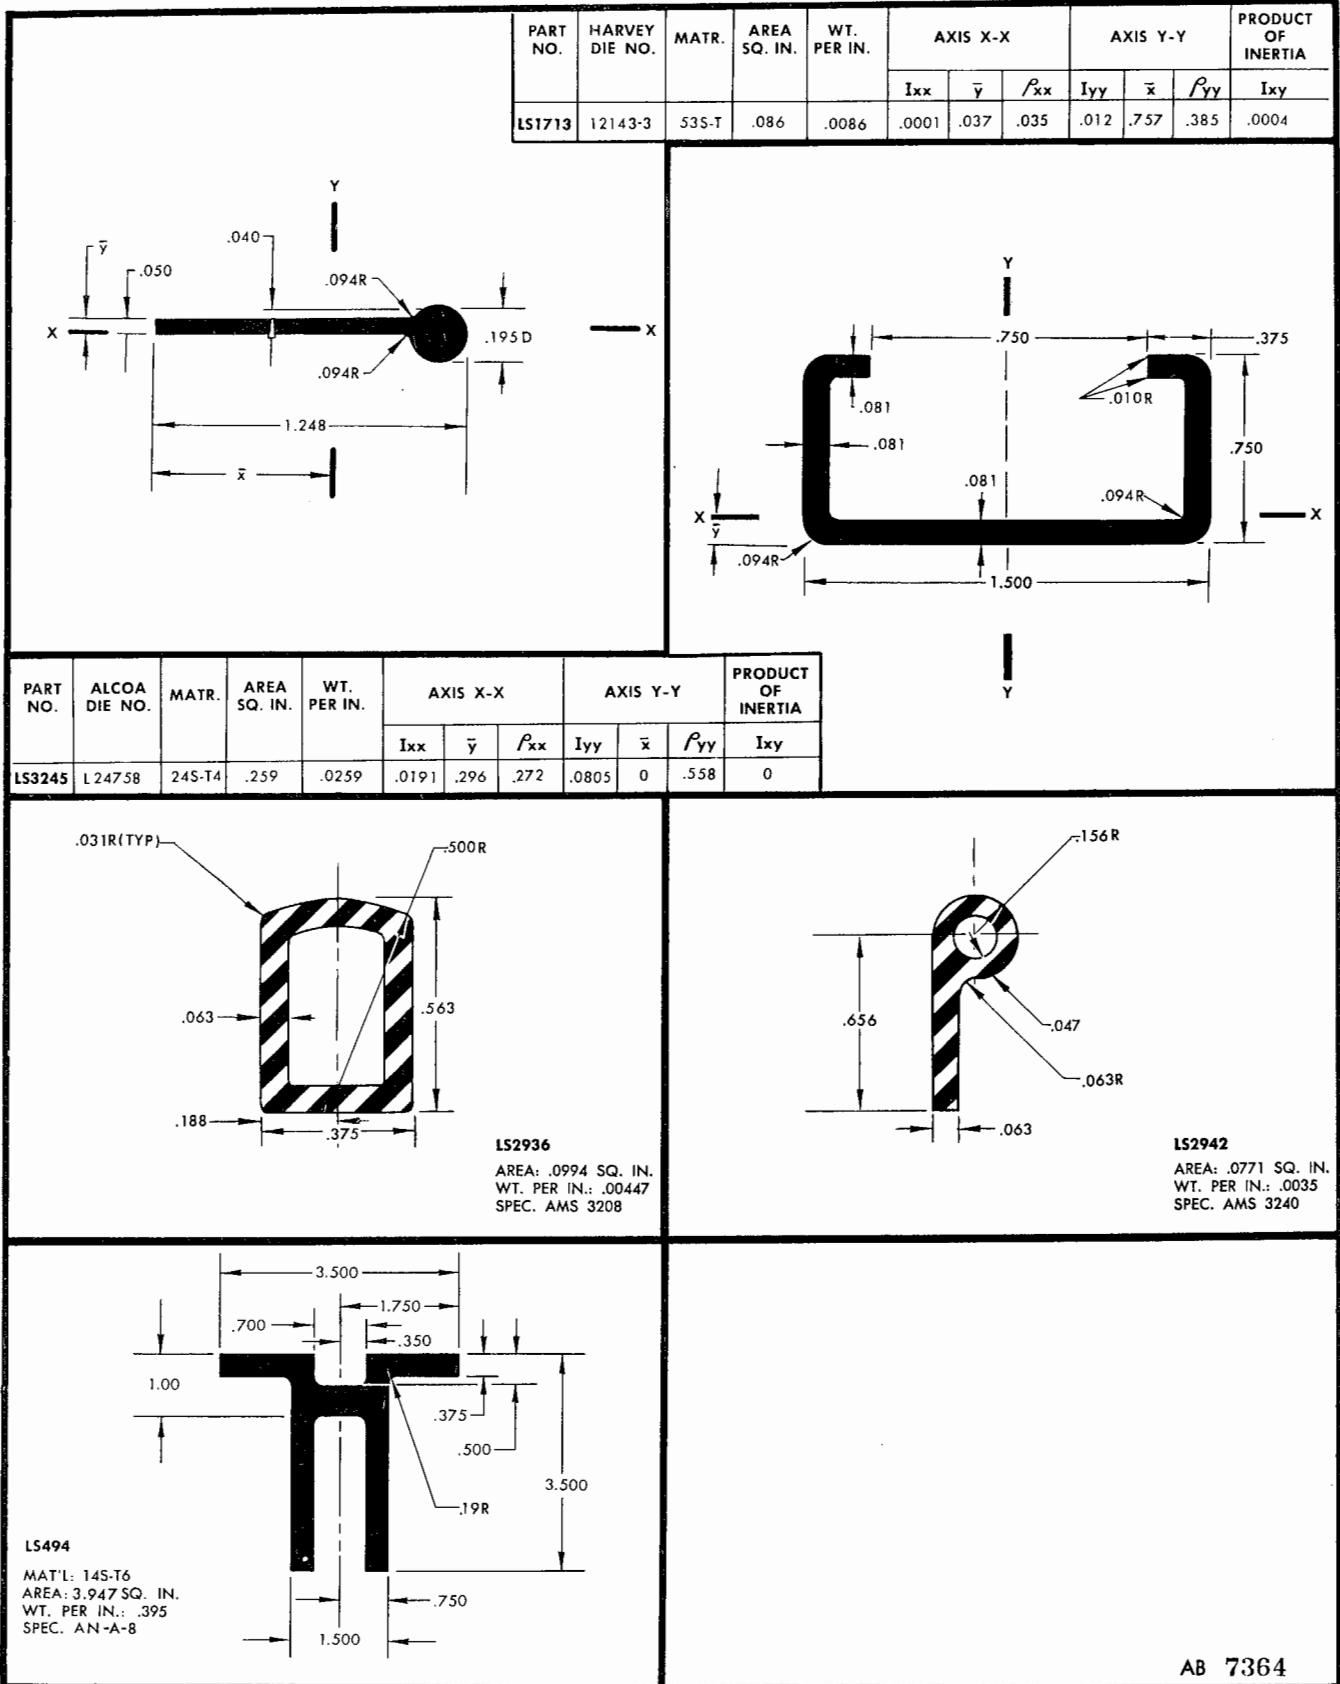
(Sheet 17C of 17 Sheets) — Extruded Standards
